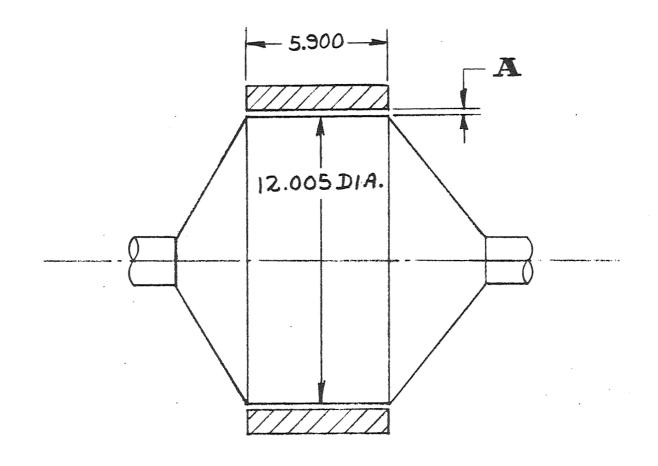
WINDAGE TEST UNIT WITH HALF THE HOUSING REMOVED
